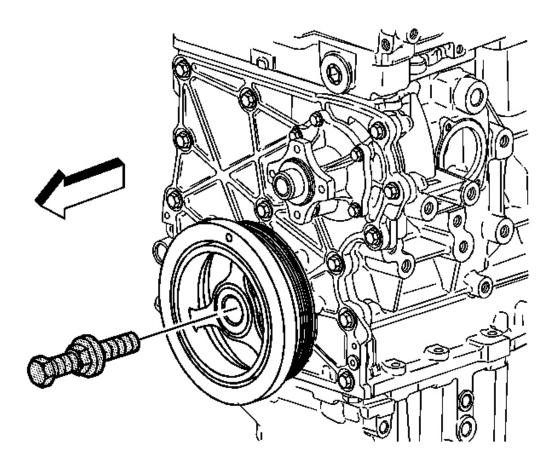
Installing Crankshaft Balancer Using The J 41478 Courtesy of GENERAL MOTORS CORP.
